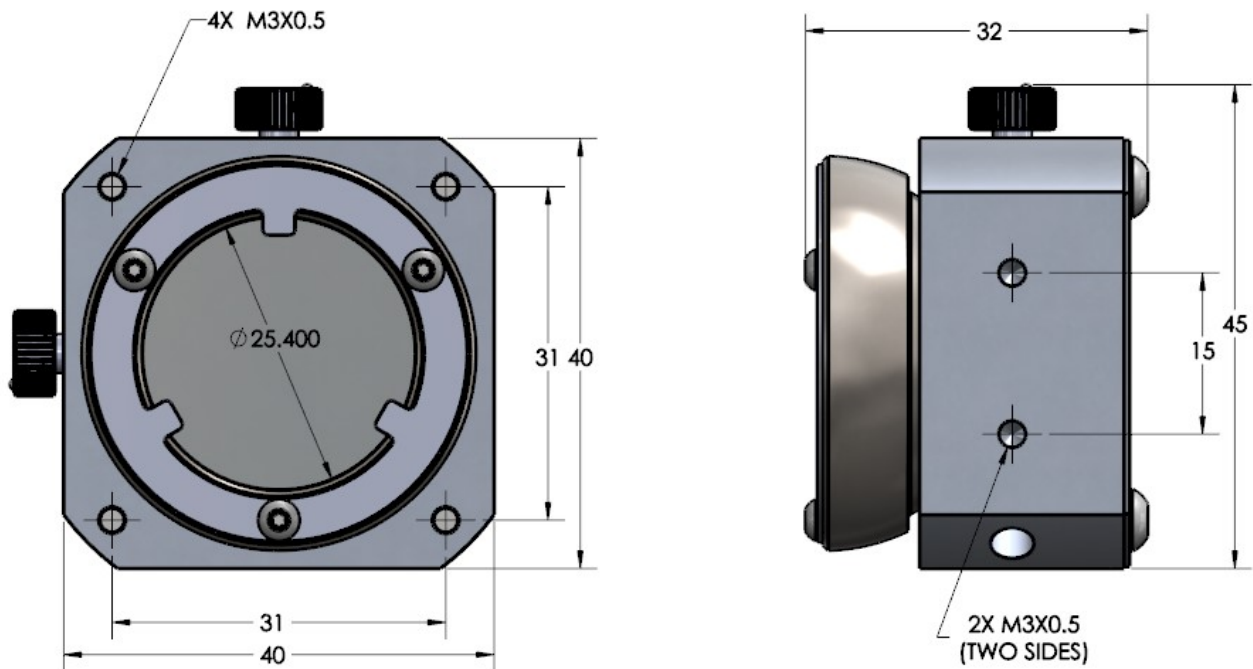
Dimensioned drawing (dimensions shown are in millimeters)
